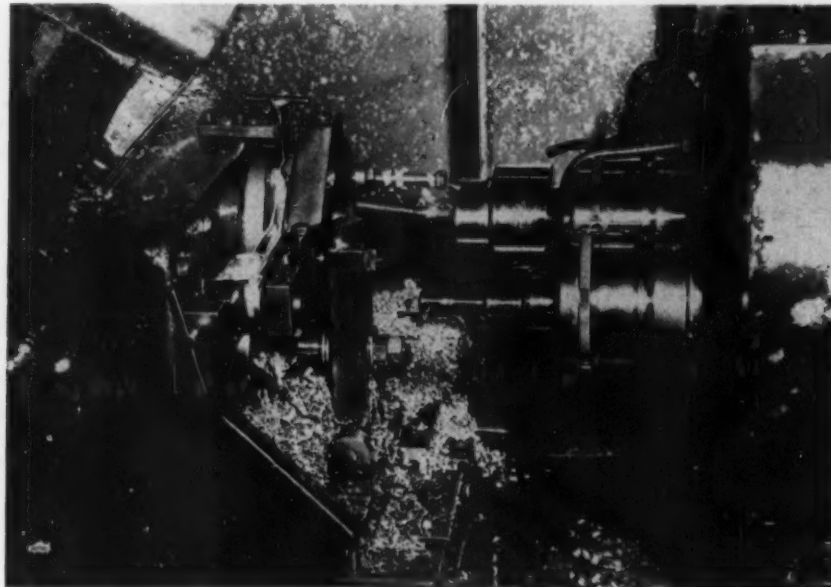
Connecting rods are bored and their large ends are faced on one side in this setup on an Excella boring machine. Only one of two ends is here shown. The carriage, left, has two separate fixtures.
